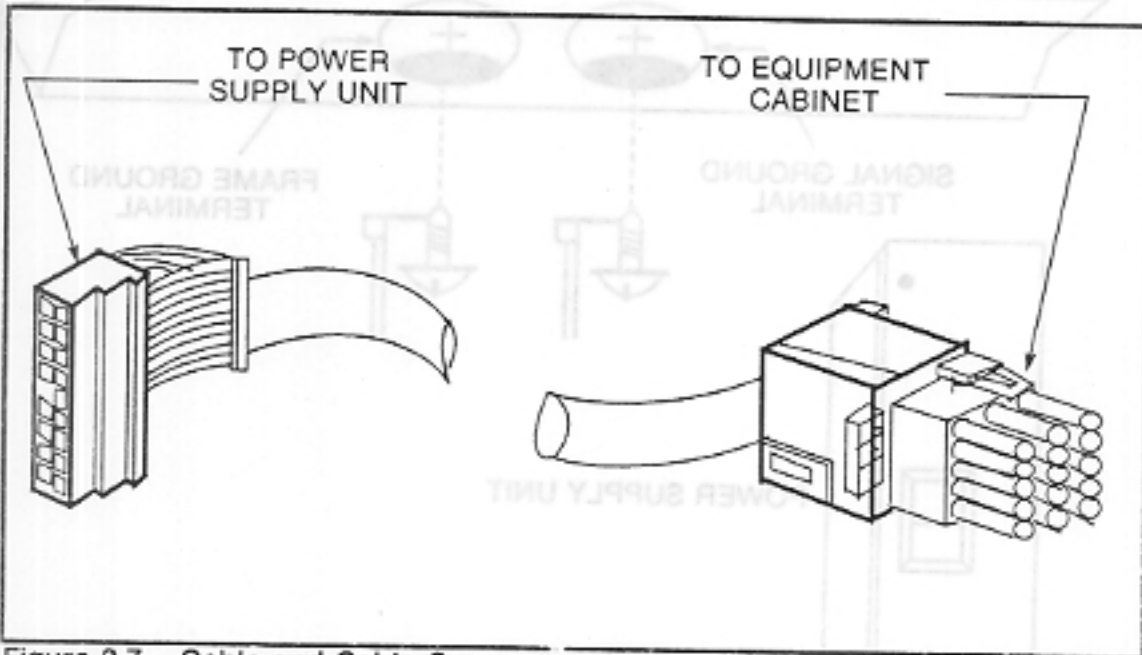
Cable and Cable Connectors for Equipment Cabinet Power Supply
